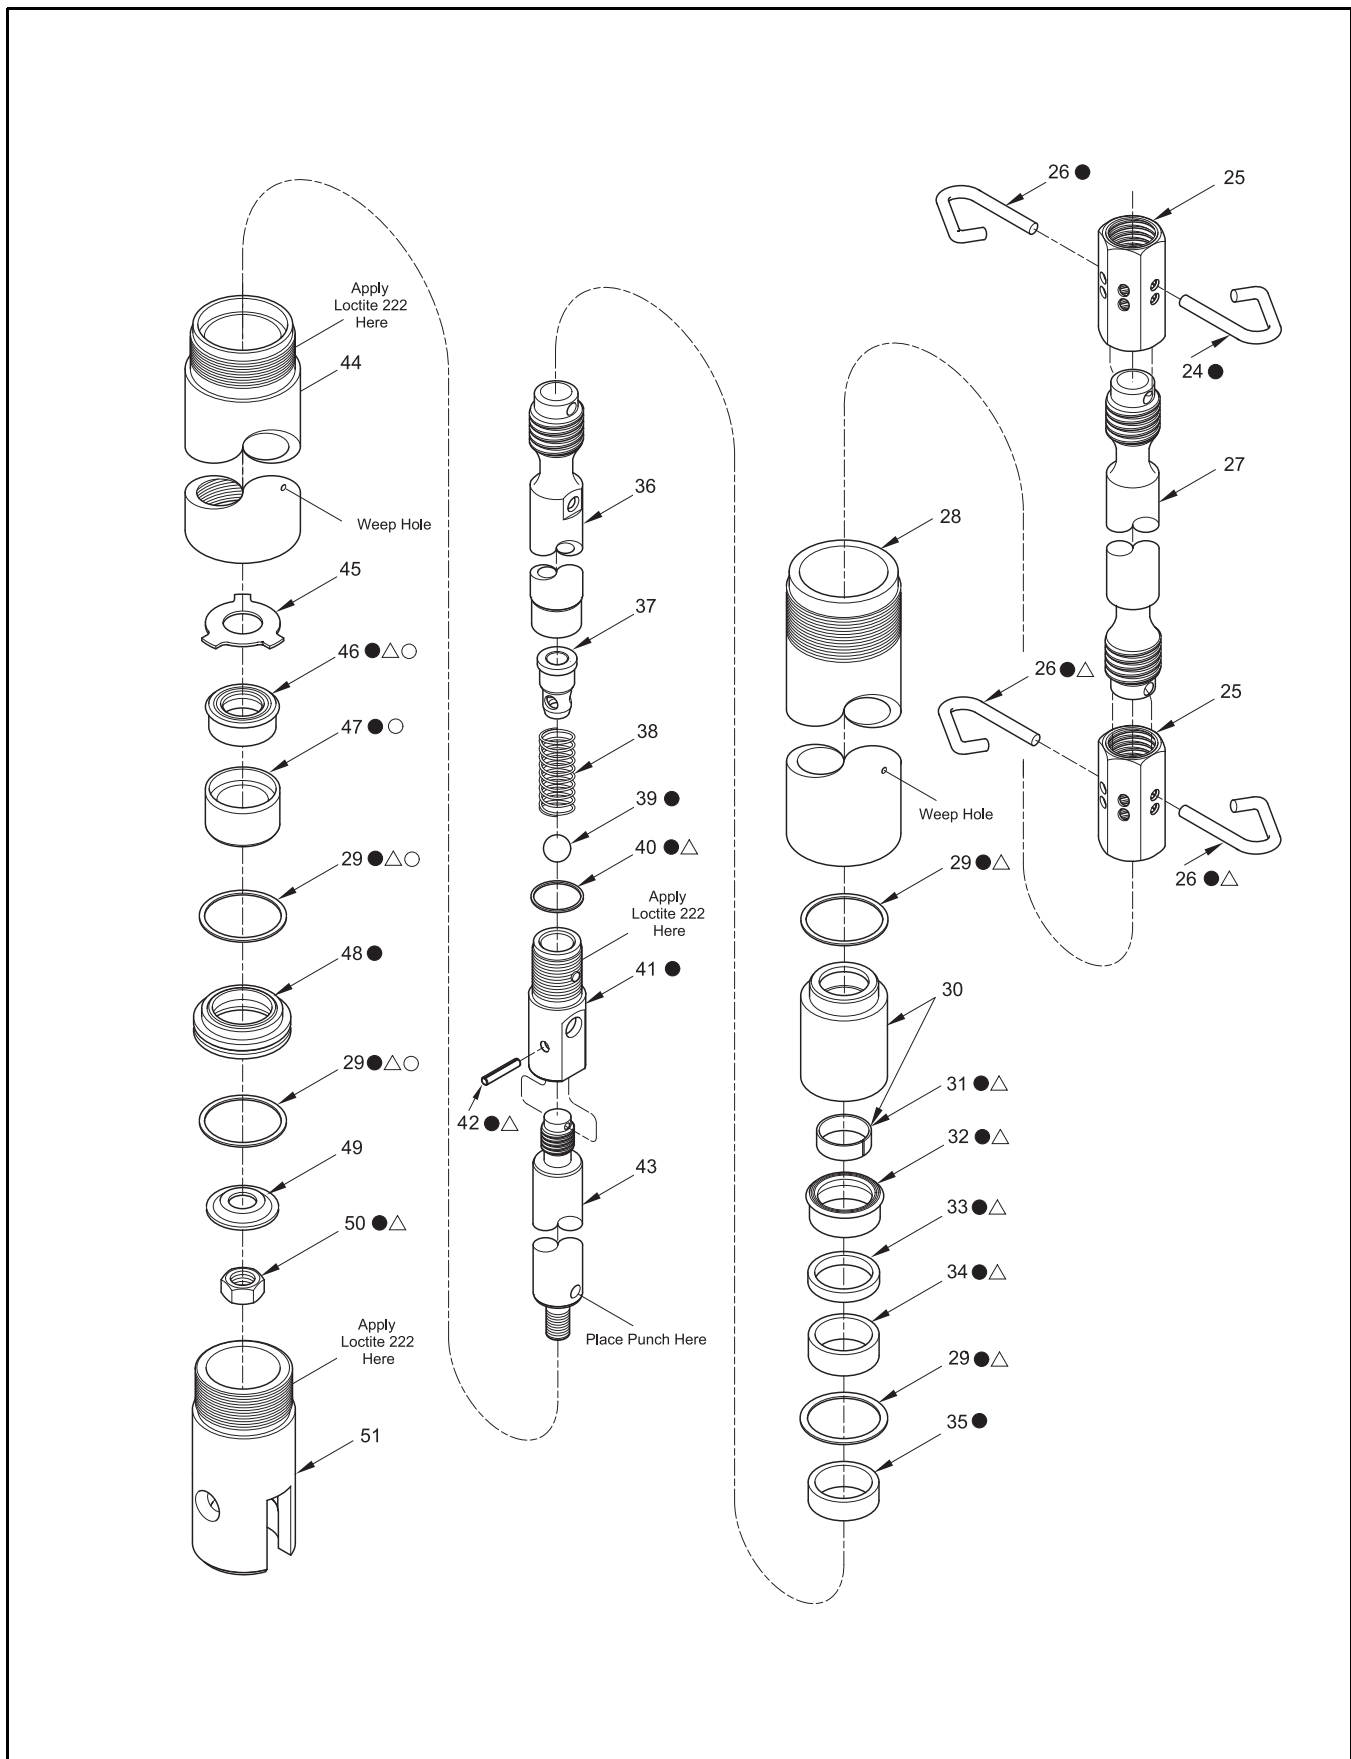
B High-Pressure Grease Pump Model 7786 Series - Exploded View
